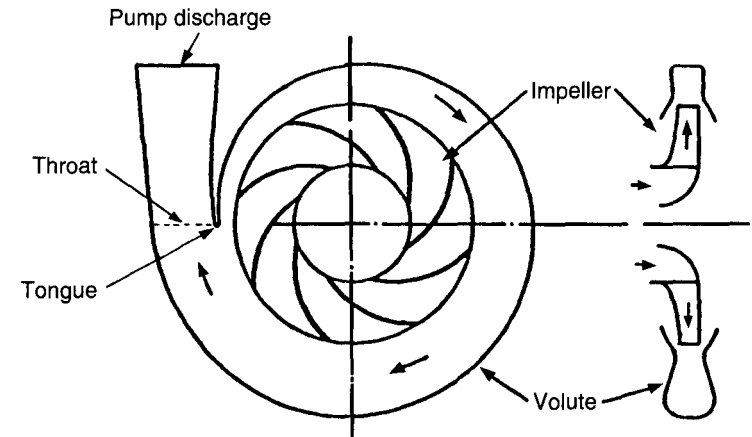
Centrifugal-pump volute. Courtesy Ingersoll-Dresser Pump Company.
